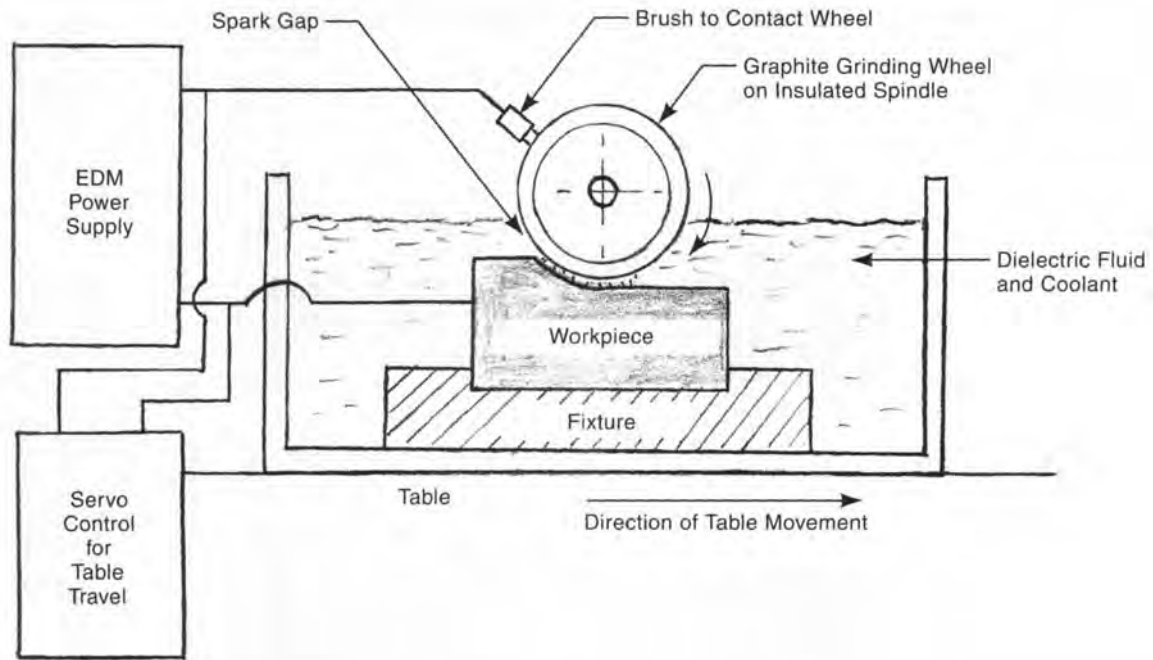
Electrical discharge grinding (EDG) - is EDM with a rotating wheel electrode. Electric sparks from the electrode erode the workpiece. The shape of the periphery of the wheel is transferred to the ground surface of the workpiece.
